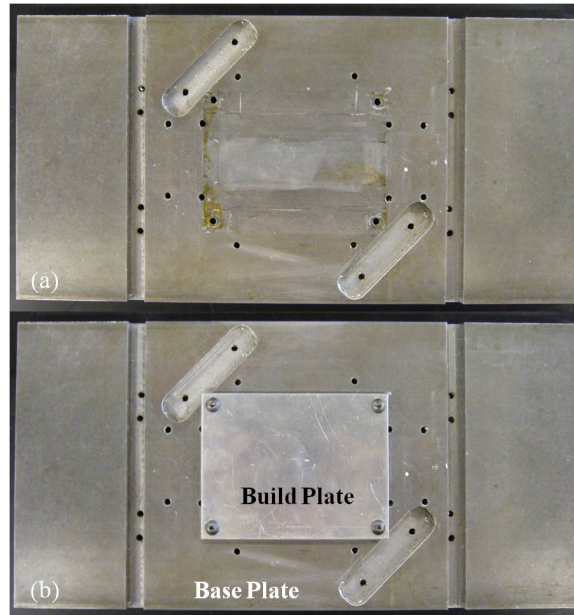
HPUAM steel base plate (a) without build plate and (b) with build plate. Machined pockets at the corners of the build plate were machined after NiTi-Al composites for an unrelated embedding study.
